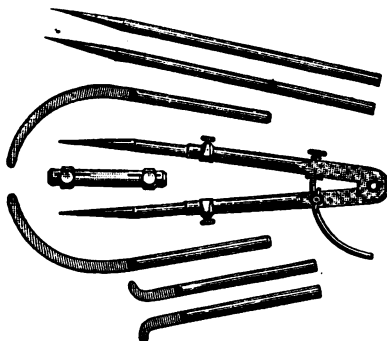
IMPROVED BRONZE DIVIDER AND CALIPER.
